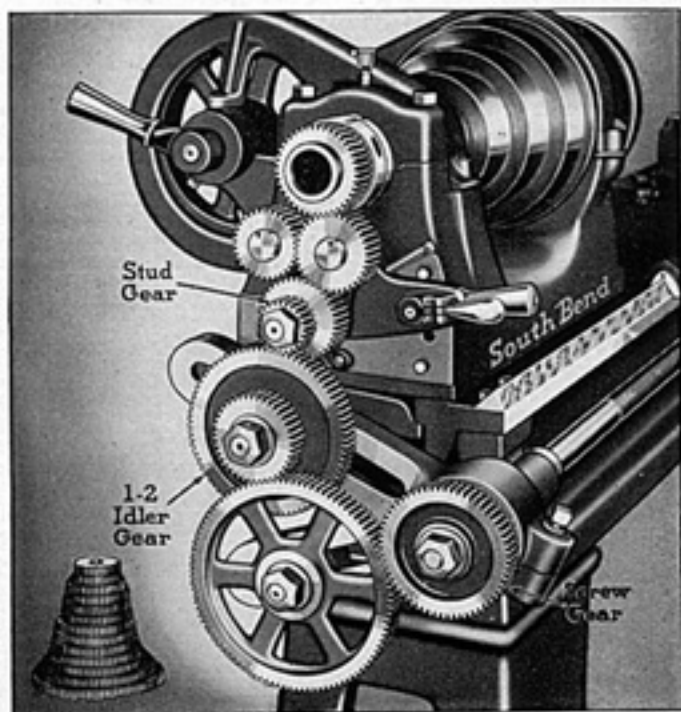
Change Gear Equipment Used on Standard Change Gear Lathes.
